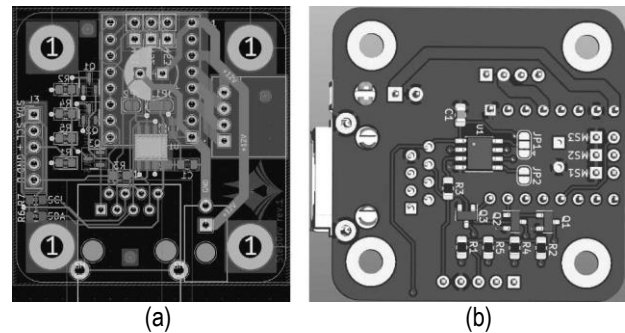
PCB design (a) and 3D view (b) of board's bottom side
